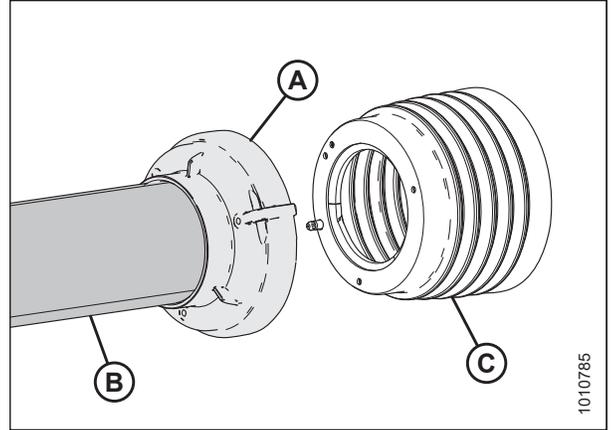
Base Cone and Shield Tube Removed from Outer Cone
